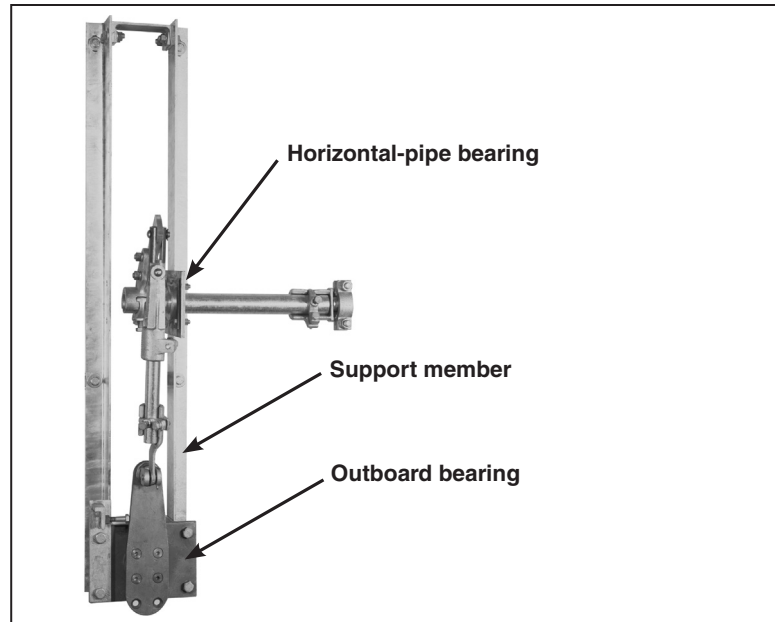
Mount the outboard bearing and the horizontal-pipe bearing.
